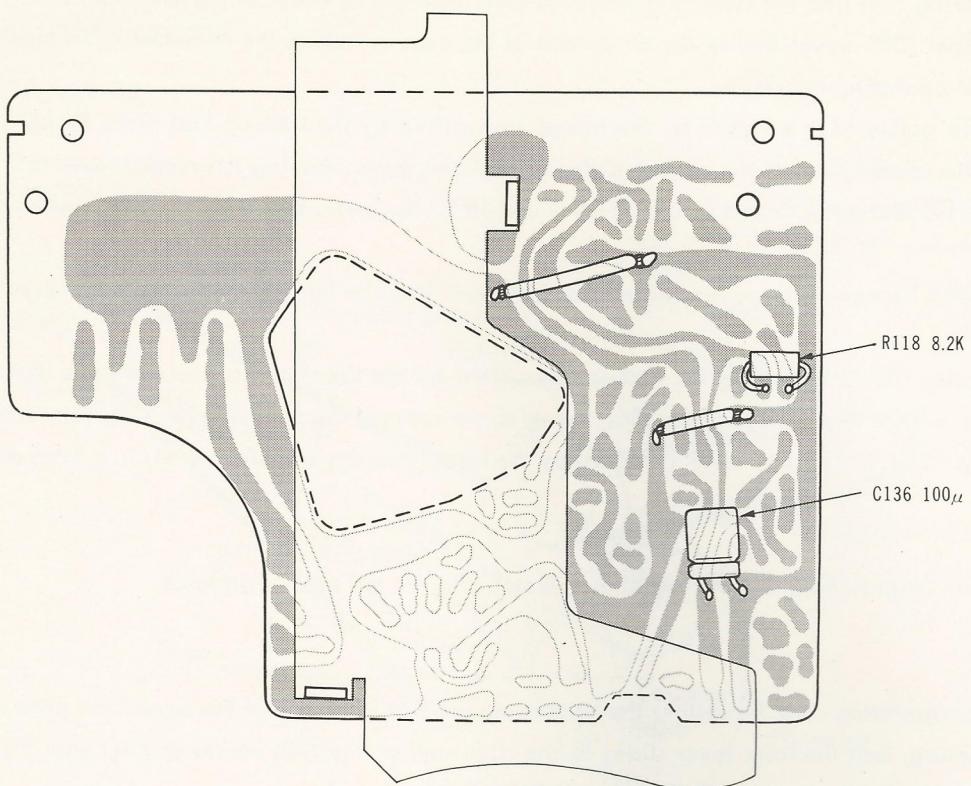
BOTTOM VIEW OF CHASSIS TUNER SECTION
